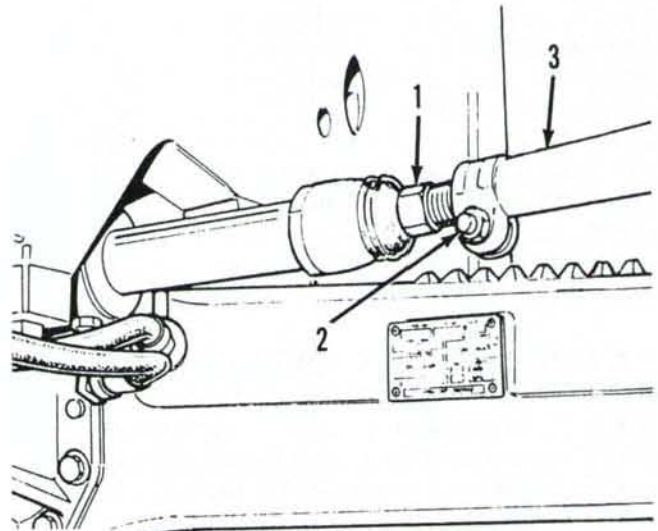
View of toe-in adjustment points for four-wheel-drive models. Be sure to adjust both sides equally. Refer to text.
